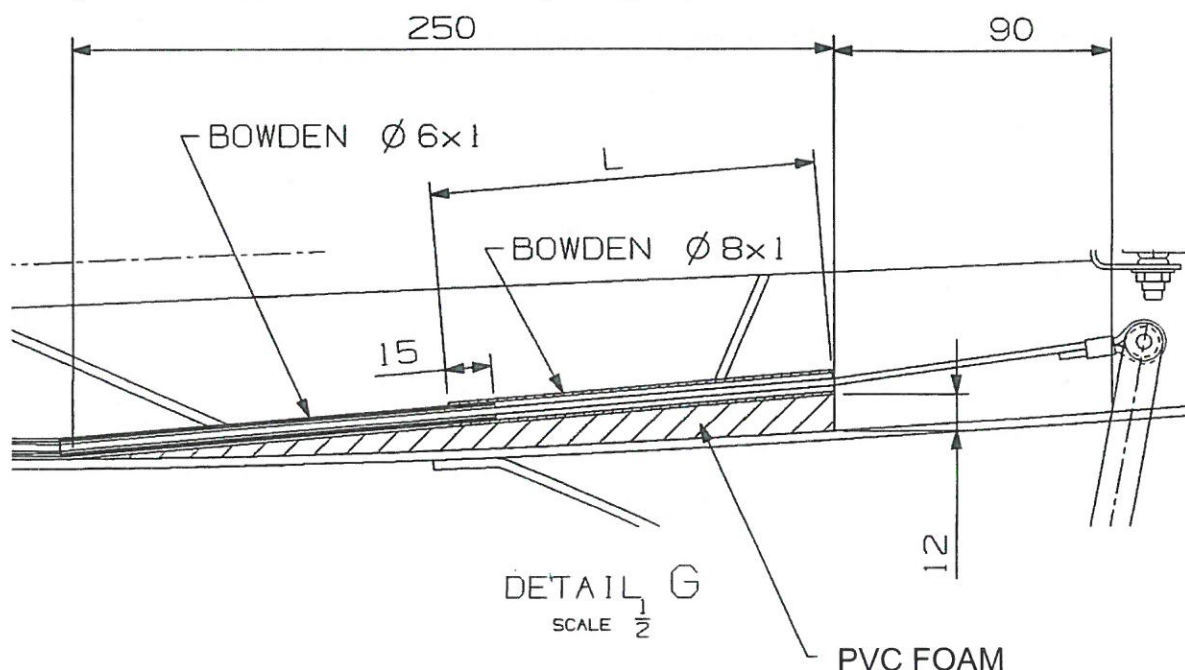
Scheme of Bowden cable's on PVC foam (side elevation)
